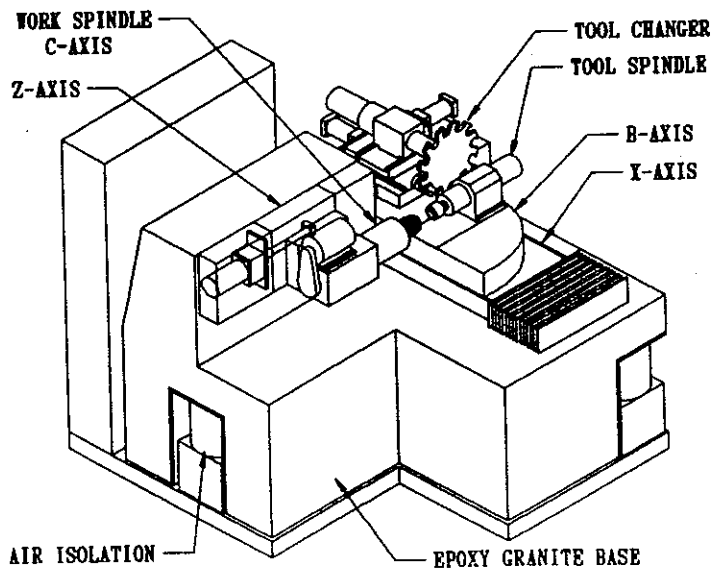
OPTICAM/SM multi-axis CNC machining center.
